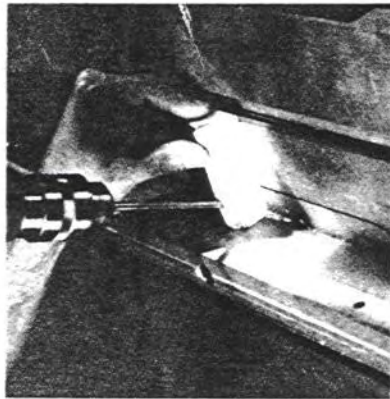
With the table tilted 30°, secure the wheel strut in a V-block to drill the axle hole.
